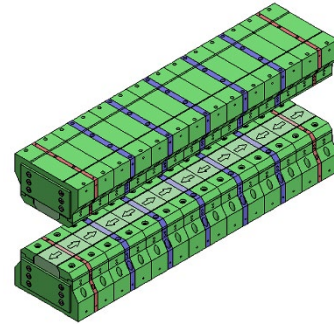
Mechanical design and clamping assembly layout of the wiggler magnet arrays and pole pieces.
